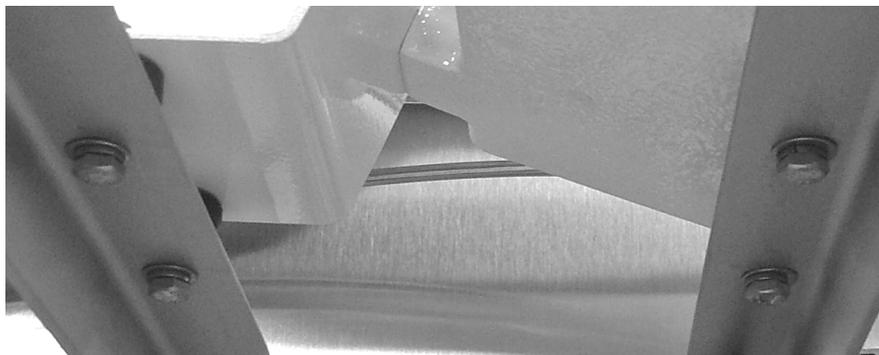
Vibrator Pan Feeder Mounting Bolts Below the Feeder
